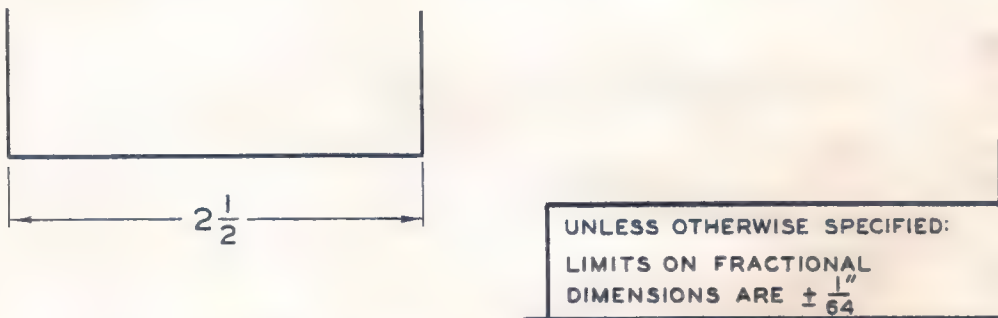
FRACTIONAL TOLERANCES APPLIED
